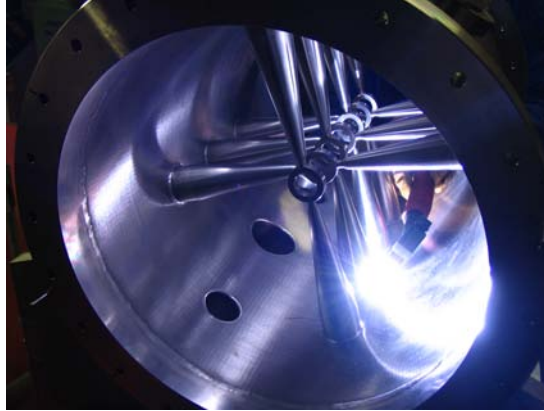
The welding of the stems into the outer cylinder.
